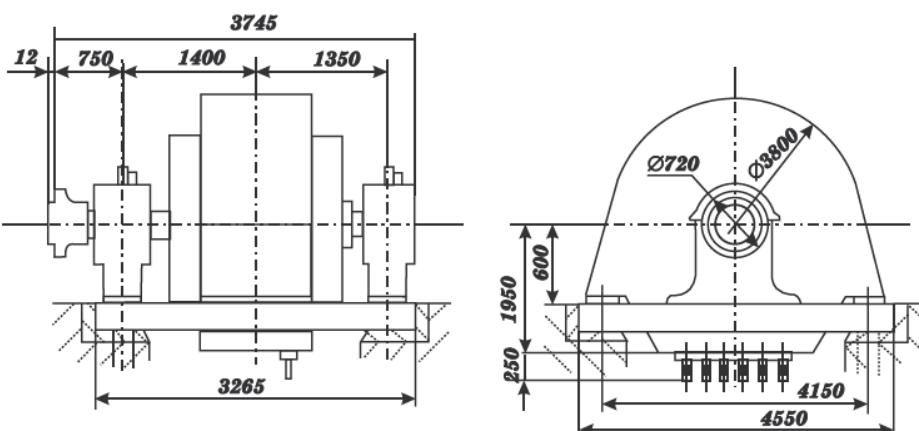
Overall and mounting dimensions of the motor ATK-20C8-12УХЛ4
